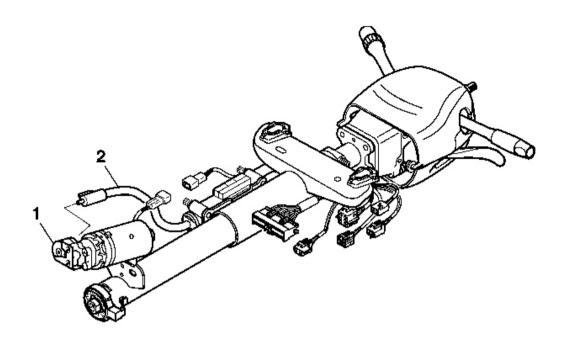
Cable Assembly & Telescope Drive Motor Assembly Courtesy of GENERAL MOTORS CORP.
